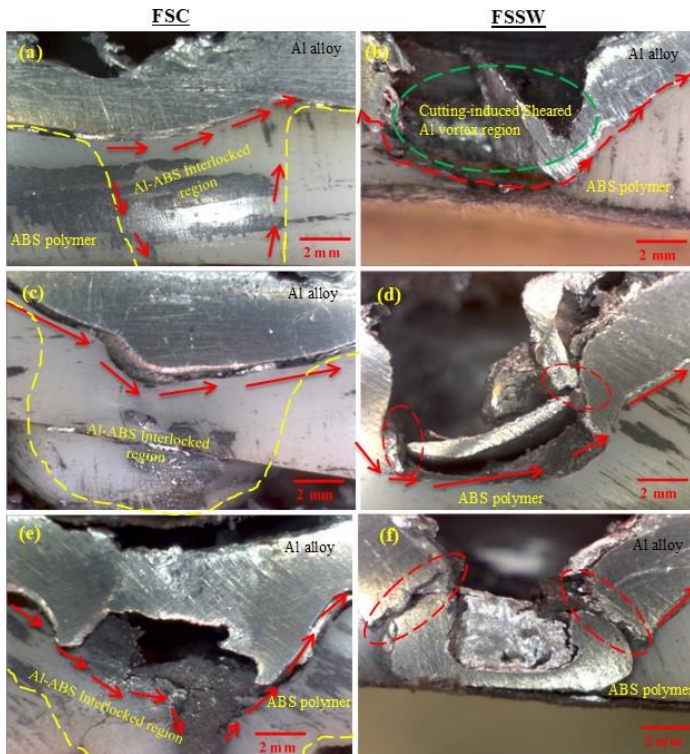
Fracture Path of the FSC and FSSW Joints (a) Unbuttoning Fracture Mode in FSC, (b) Unbuttoning Fracture Mode in FSSW, (c) Circumferential-Partial Al in-Polymer Shearing Mode in FSC, (d) Circumferential-Partial Al in-Polymer Shearing Mode in FSSW Joint, (e) Mid-Nugget Shearing Mode in FSC, (f) Mid-Nugget Shearing Mode in FSSW Joint
